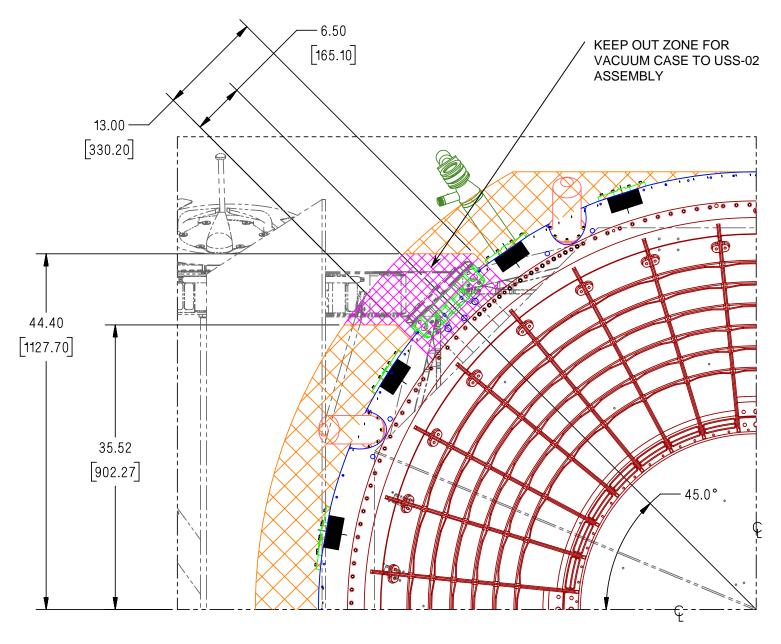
Detail View of the Keep Out Zone for the VC/USS-02 Assembly
